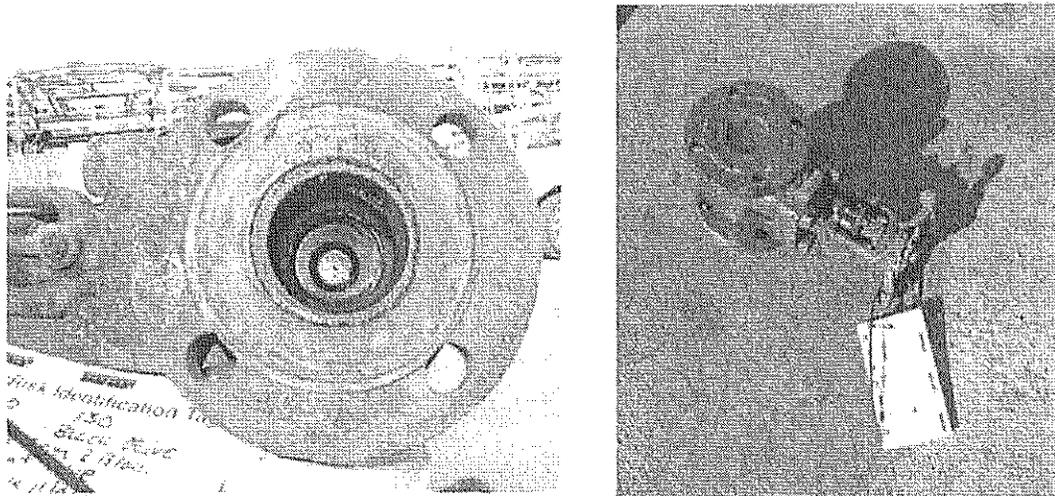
Closed steam block valve recovered from residue treater heater steam supply valve
